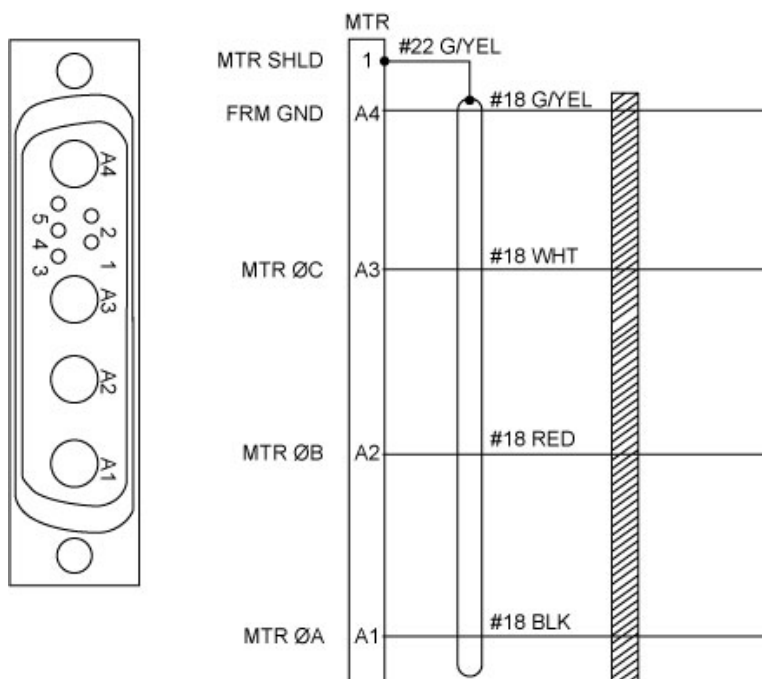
Motor Wiring Connector for all PRO115 Stages
